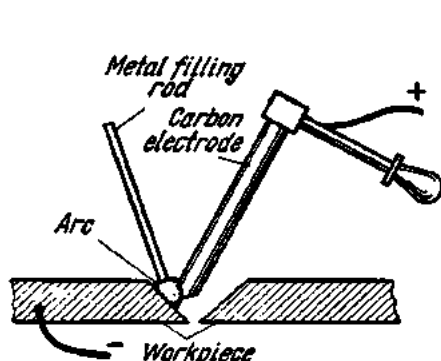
The Bernardos (carbon-electrode) welding process
